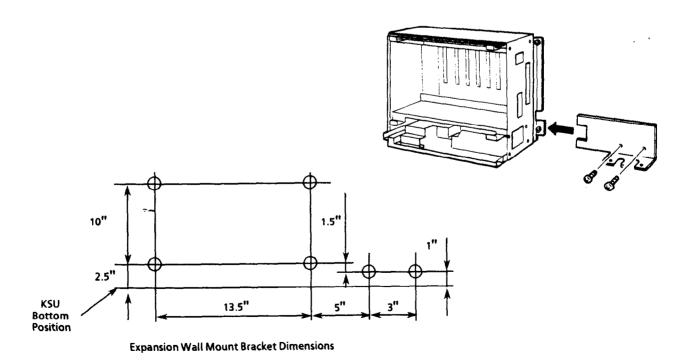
Attaching the Wall Mount Bracket of the Level II Expansion KSU to the Wall
